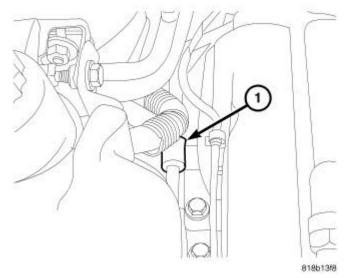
Turbocharger Flange, Band Clamp & Down-Pipe Courtesy of CHRYSLER GROUP, LLC
